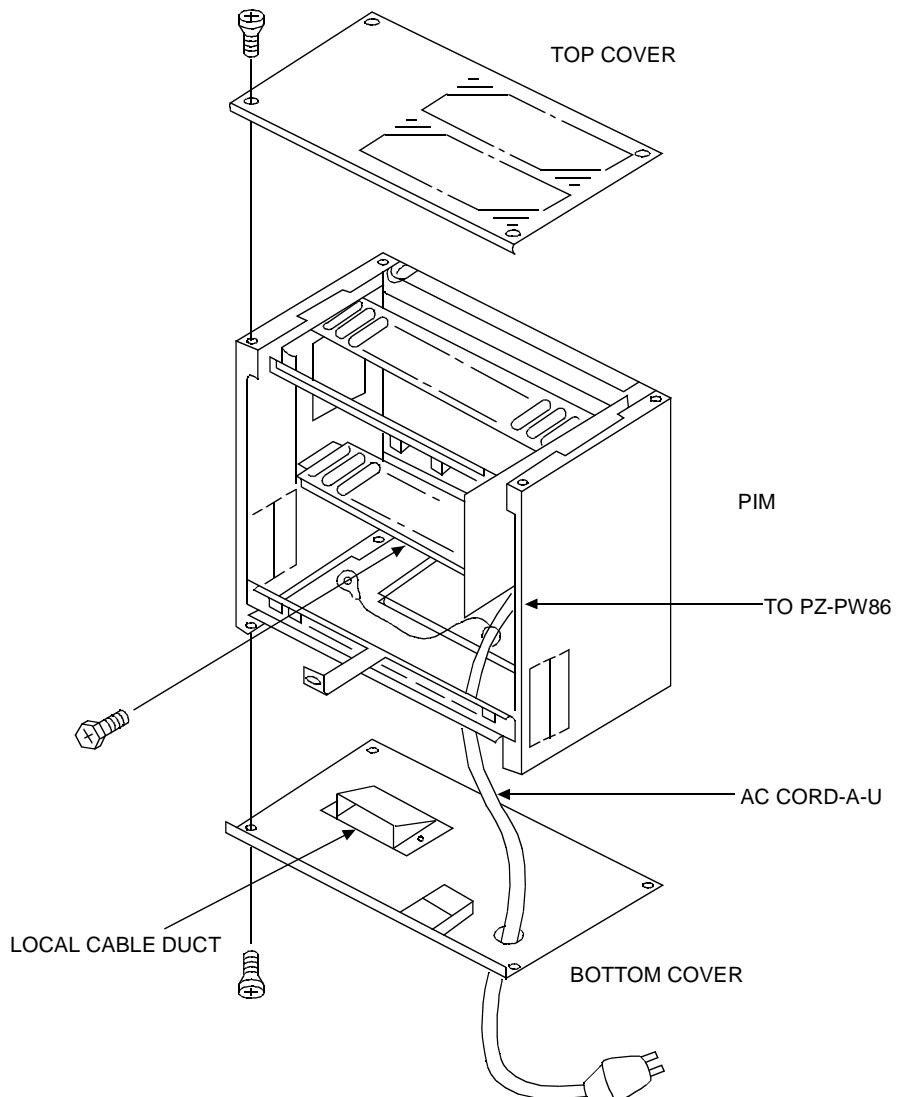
Mounting the PIM to the RACK PARTS
